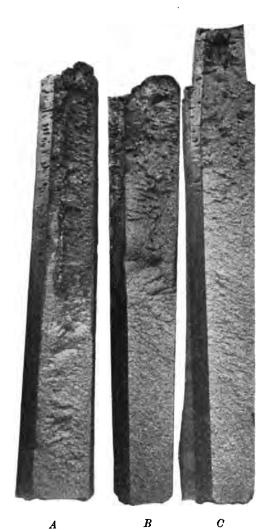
Casting with the Large End Uppermost, and with a Sinking-Head, Shortens the Pipe in Steel Ingots See & 42 and 44.
